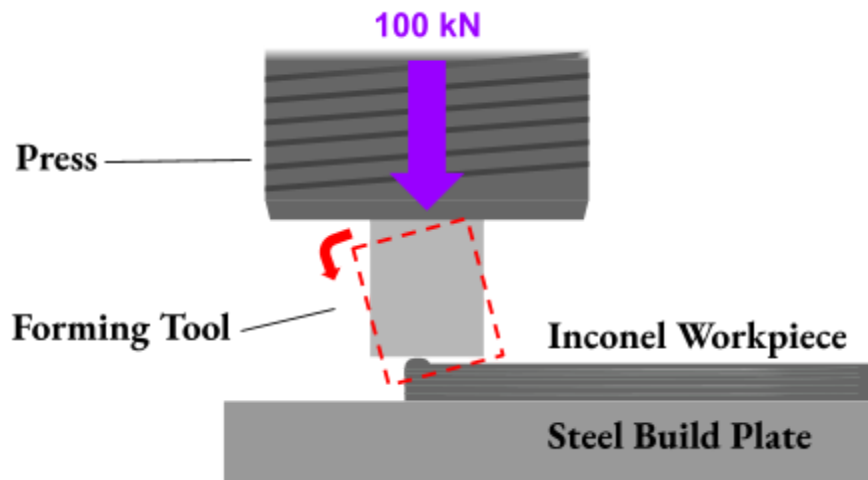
Unfixed Compression Testing Tool Failure Diagram
